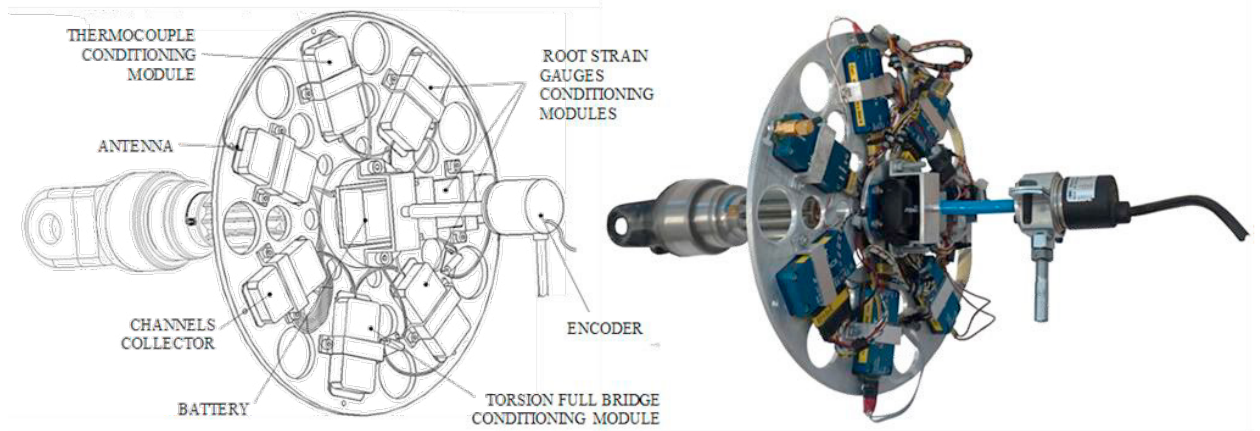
Assembly of the aluminium plate carrying the telemetry modules.
